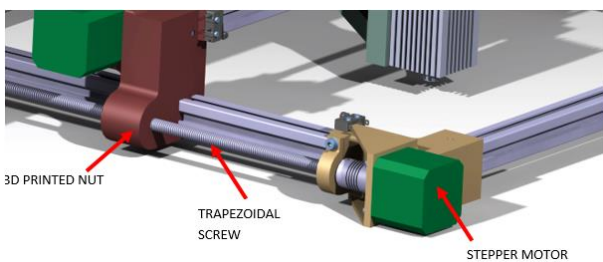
The constructive solution with trapezoidal screw and 3d print supports
